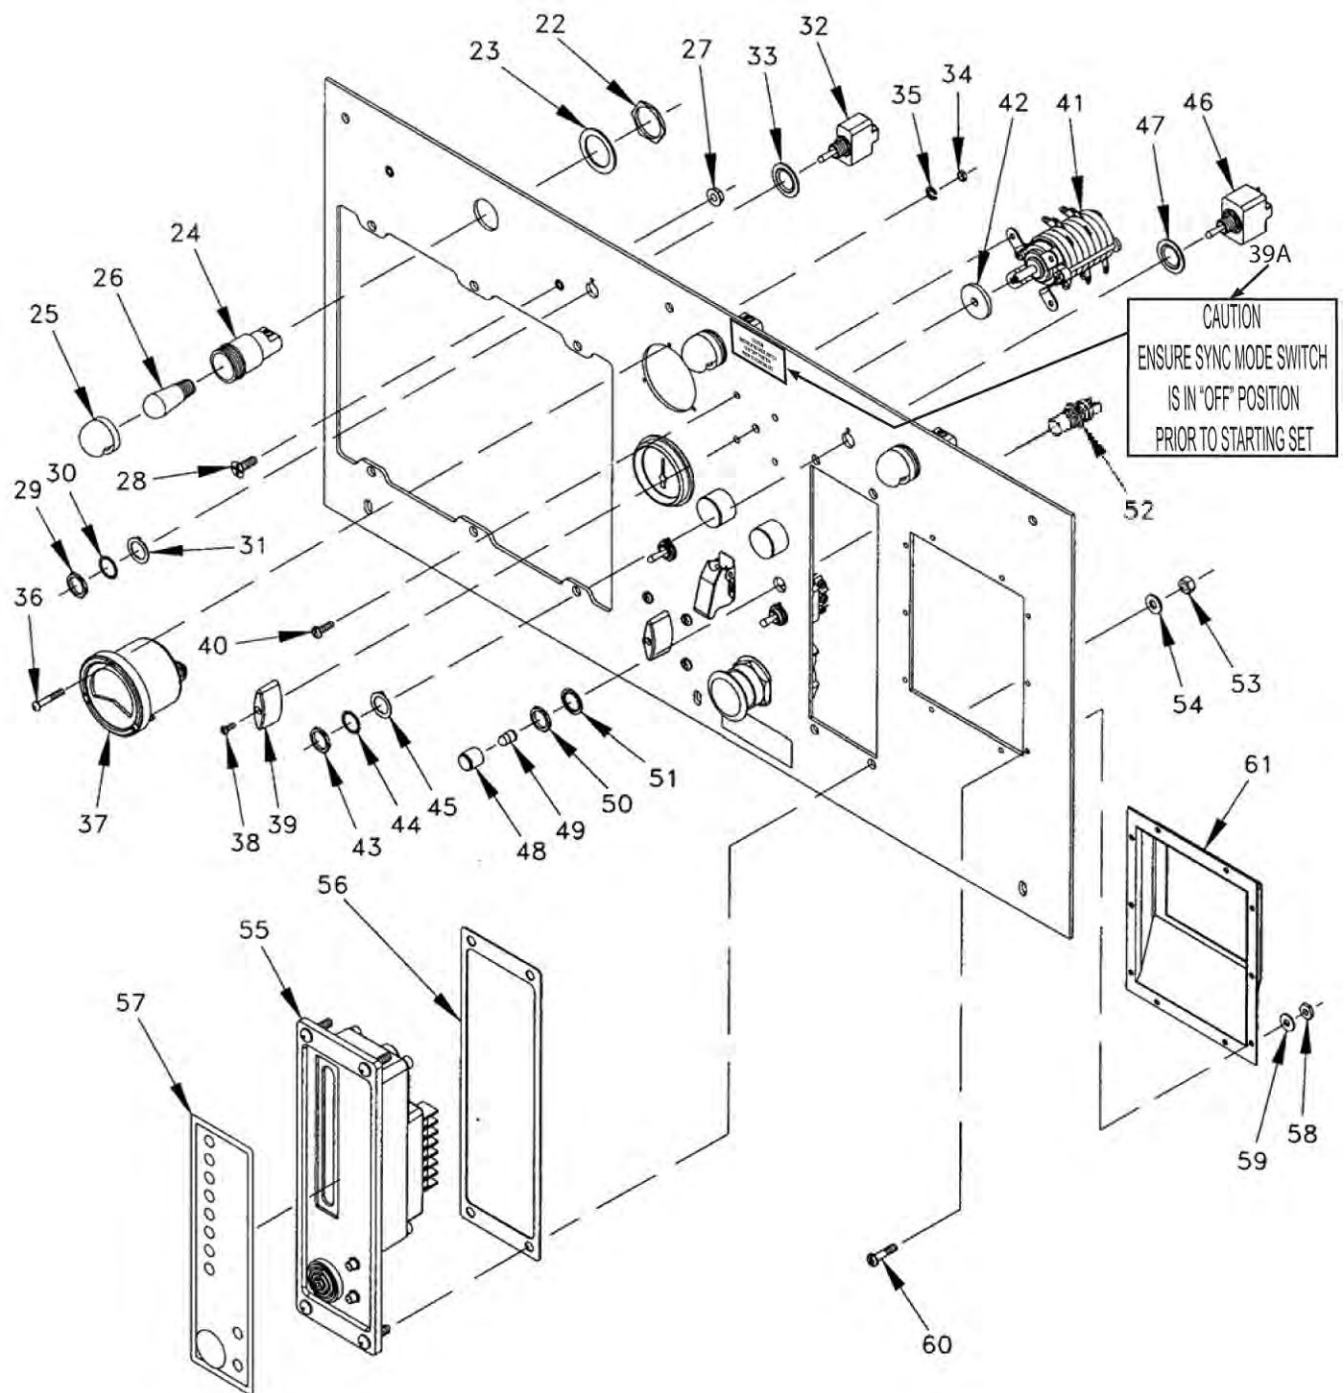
Control Box Panel Assembly (Sheet 3 of 4).
